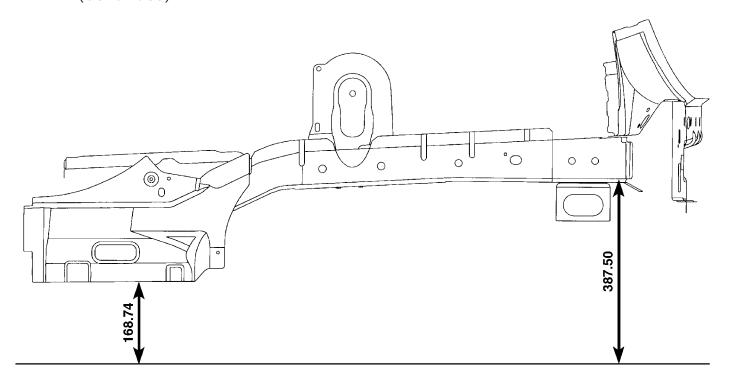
ENGINE COMPARTMENT SIDE AND BOTTOM VIEW
